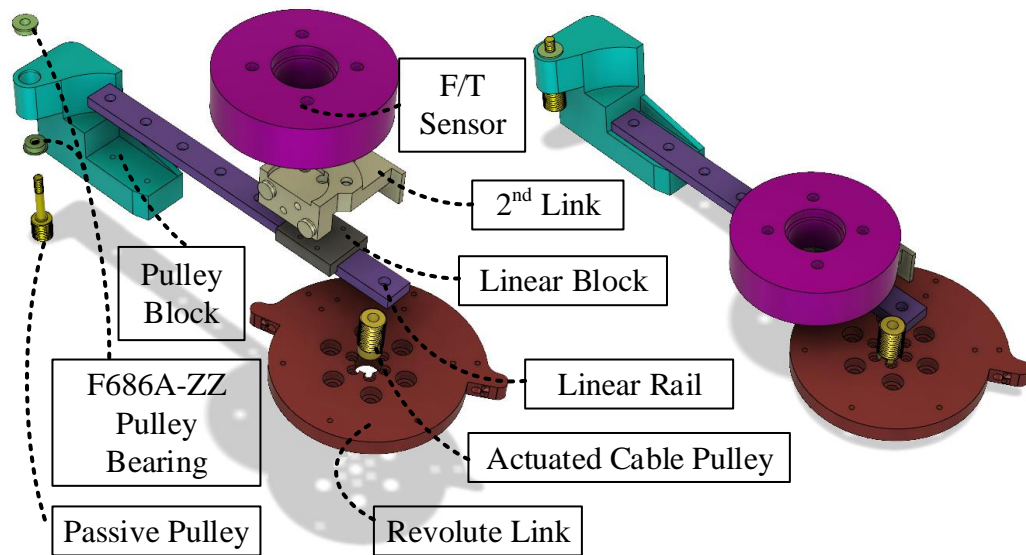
Prismatic link parts before assembled (left), assembled (right)
